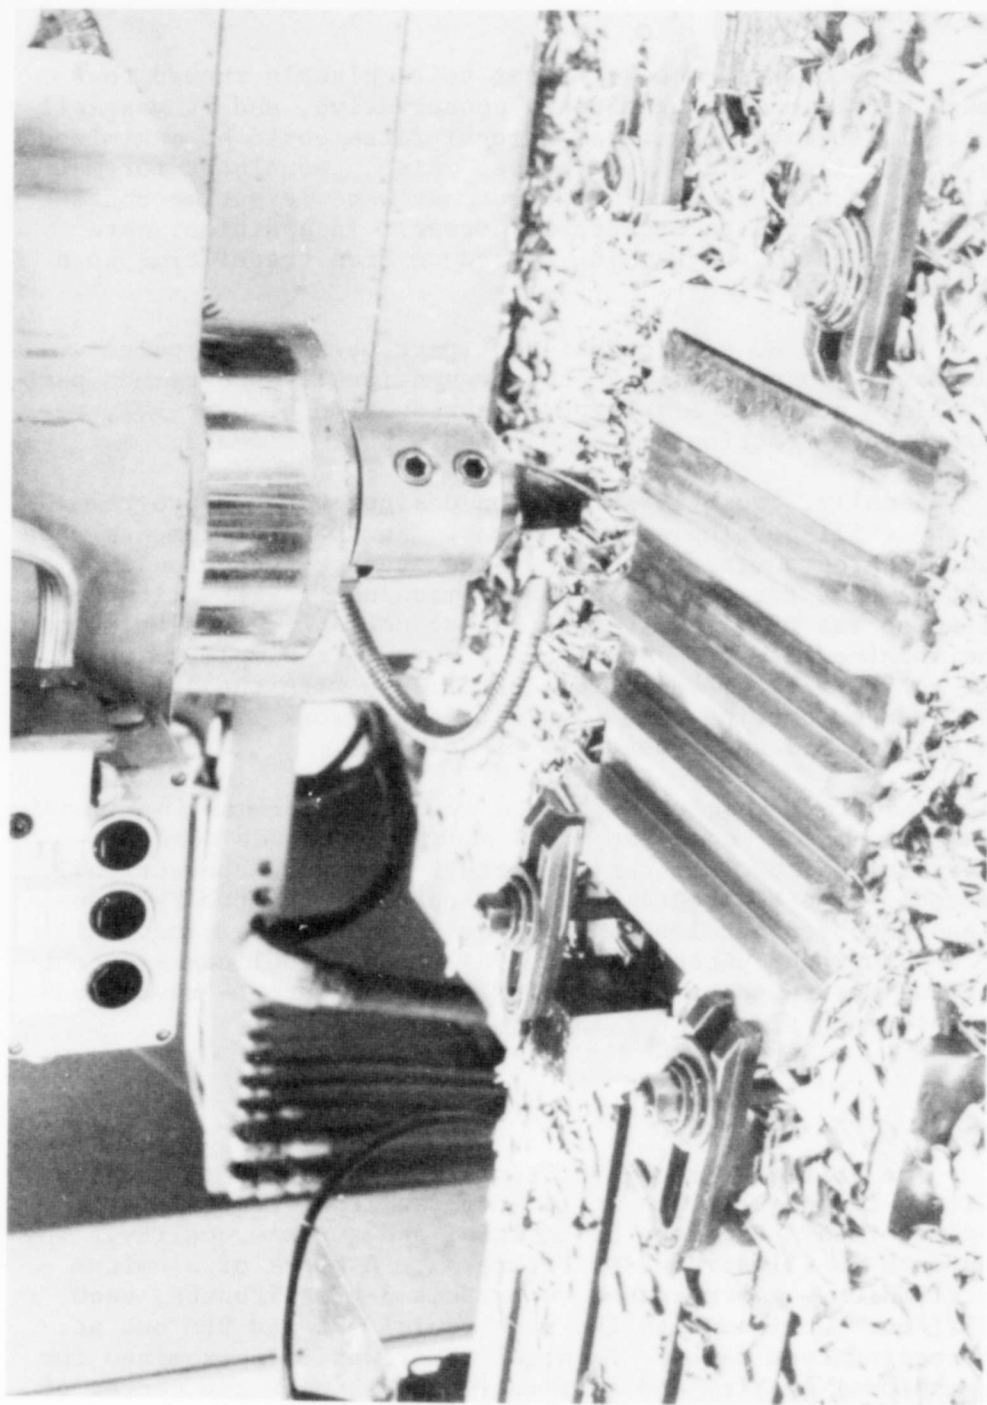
STIFFENER MACHINING TEST ON BOHLE VERTICAL MILL
